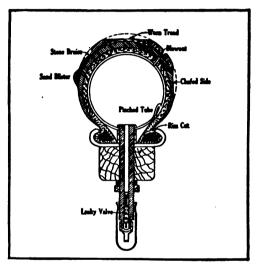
Sectional View of Pneumatic Tire, Showing the Defective Conditions Which Demand Attention.
